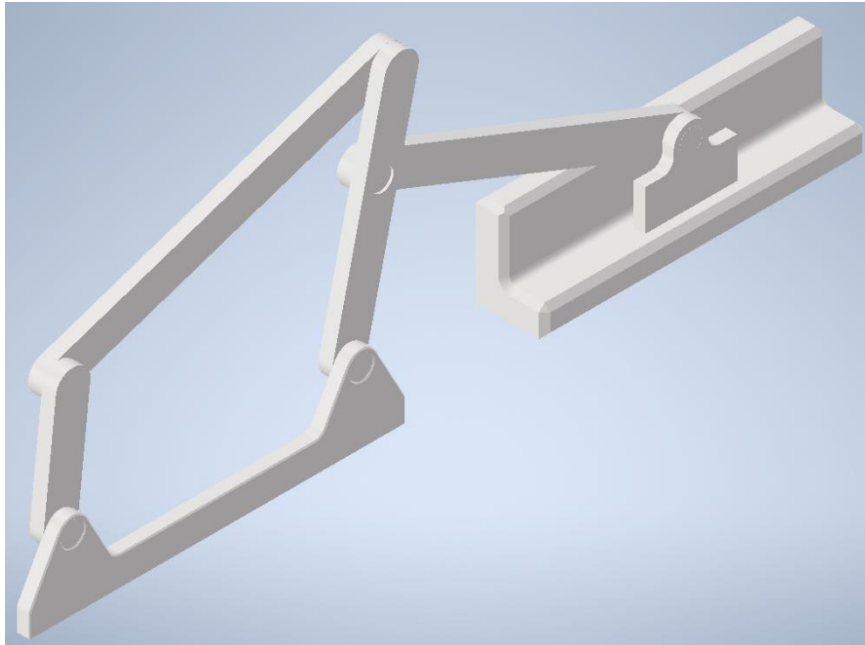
The final shape of the assembly geometrically modeled in Inventor
